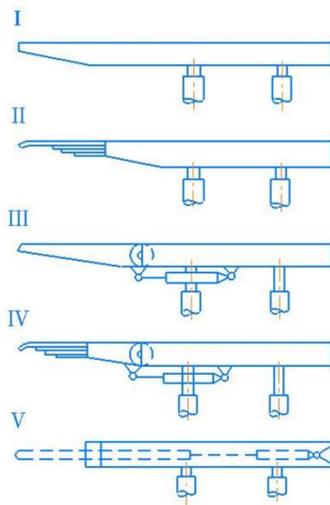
Structural schemes of the cantilever part of the supporting overlap:
